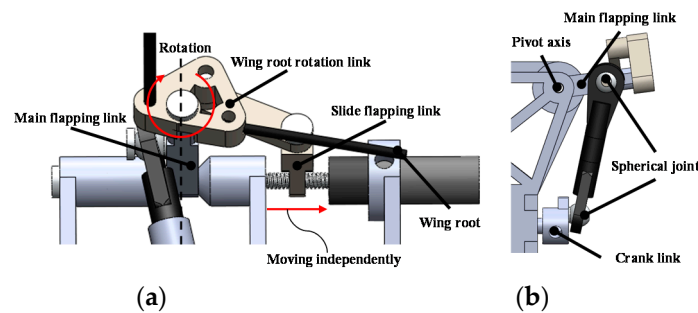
(a) Side view of the prototype design for the rotation mechanism; (b) front view of prototype design for the flapping mechanism.
